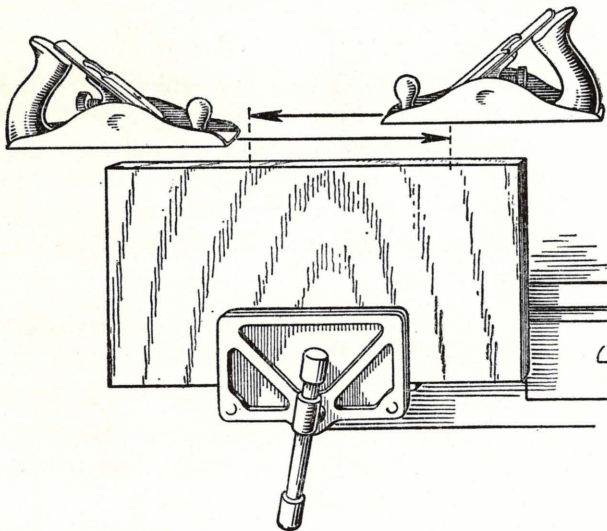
When planing the end of a wide piece of stock, plane both ways past the center to avoid splitting of the corners
